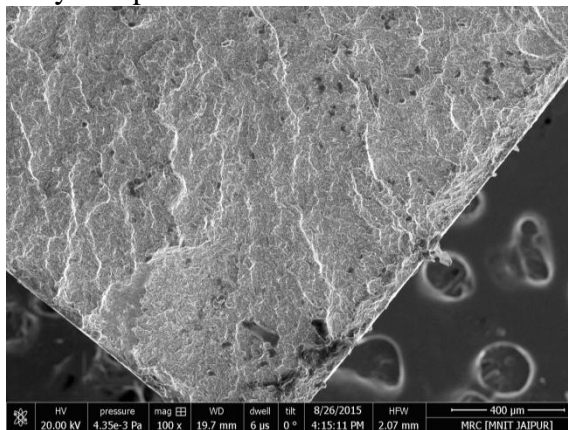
SEM fractographs for 5 wt.-% of CaO particulate filled ZA-27 alloy composites after fracture test
